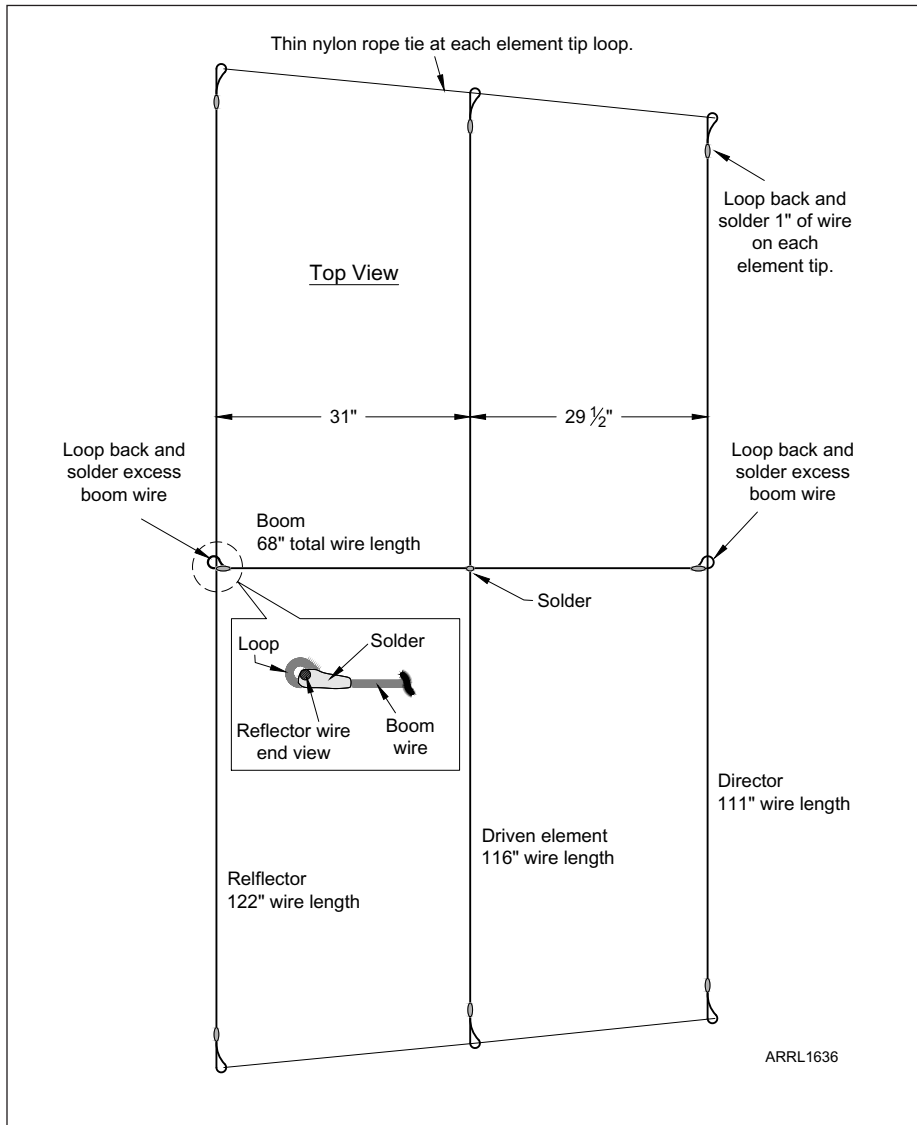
Dimensions of the Stealth 6-Meter Wire Beam.
